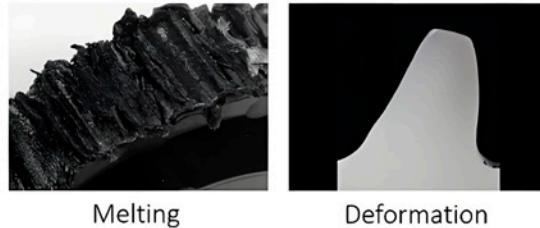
Typical gear damage patterns and failure appearances at a glance.
